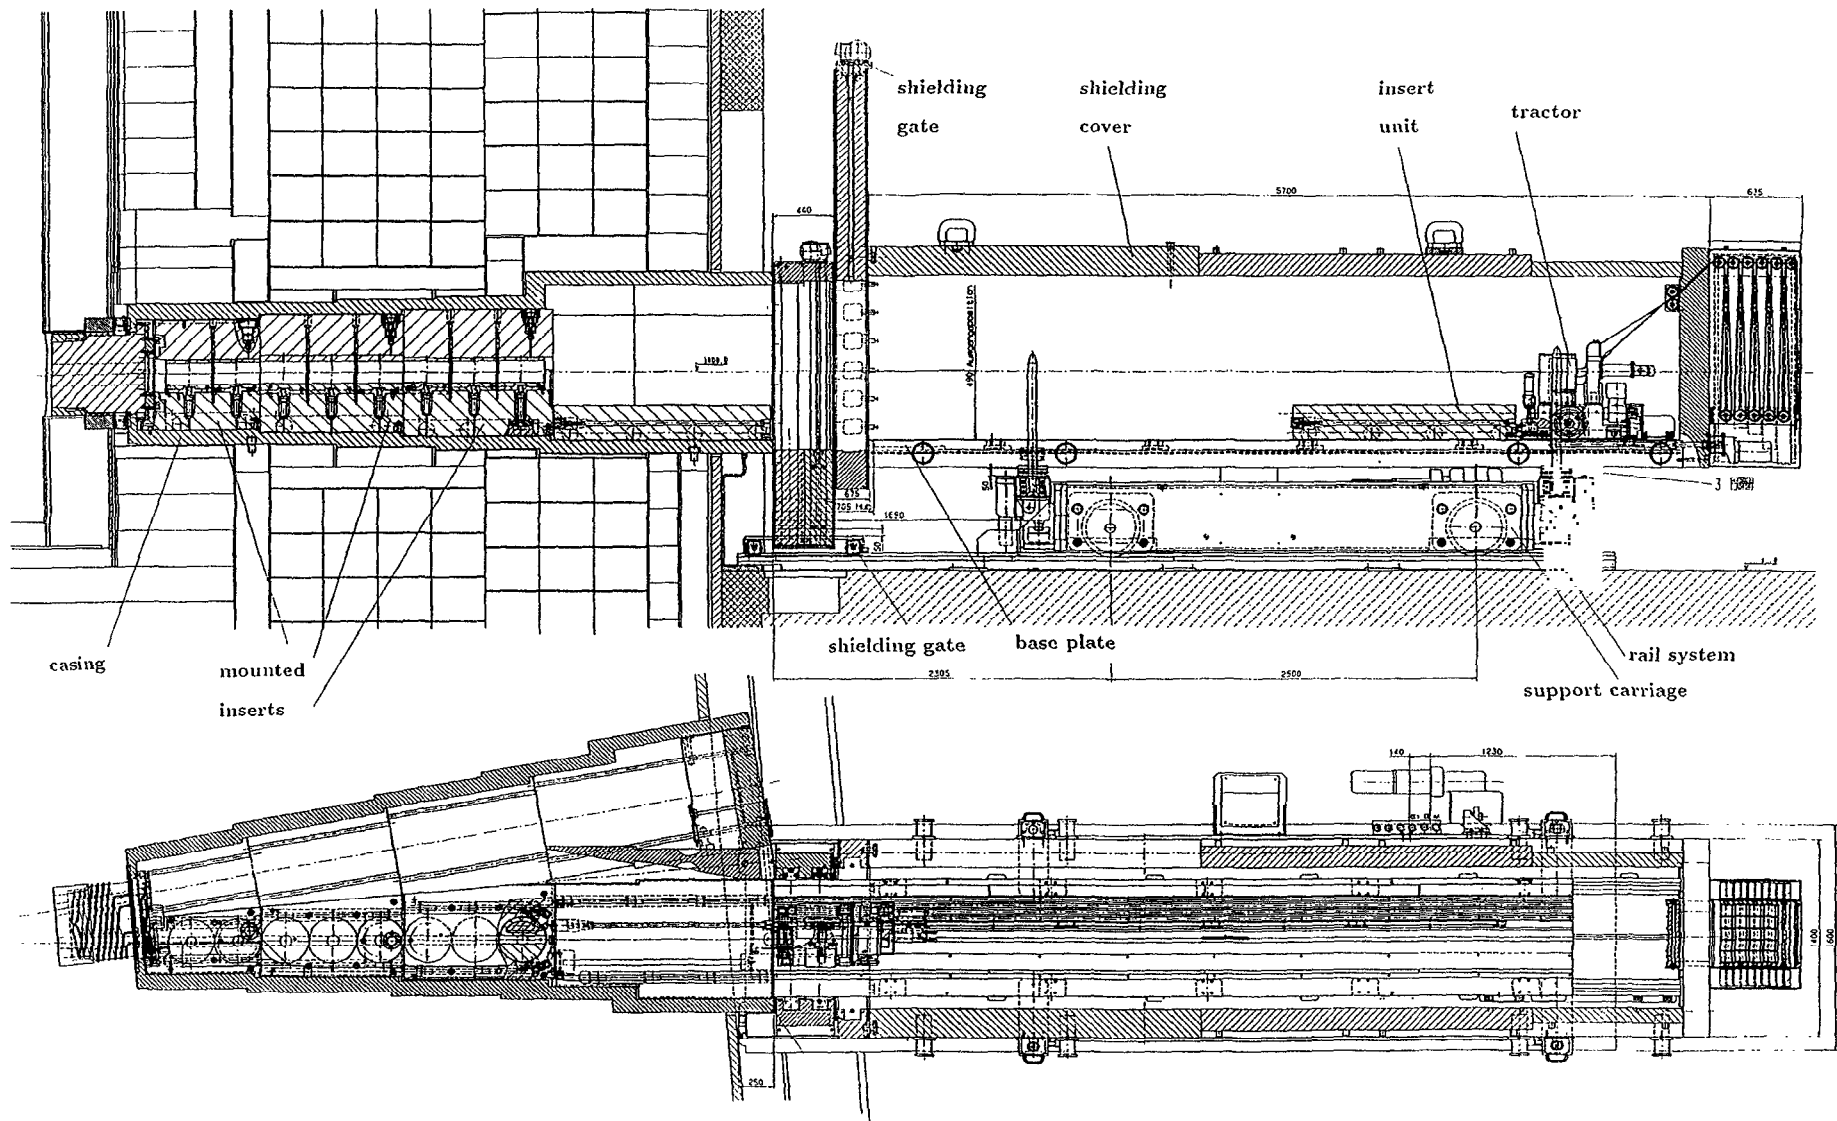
Mounting or exchange of beam port inserts with the shielded handling device
